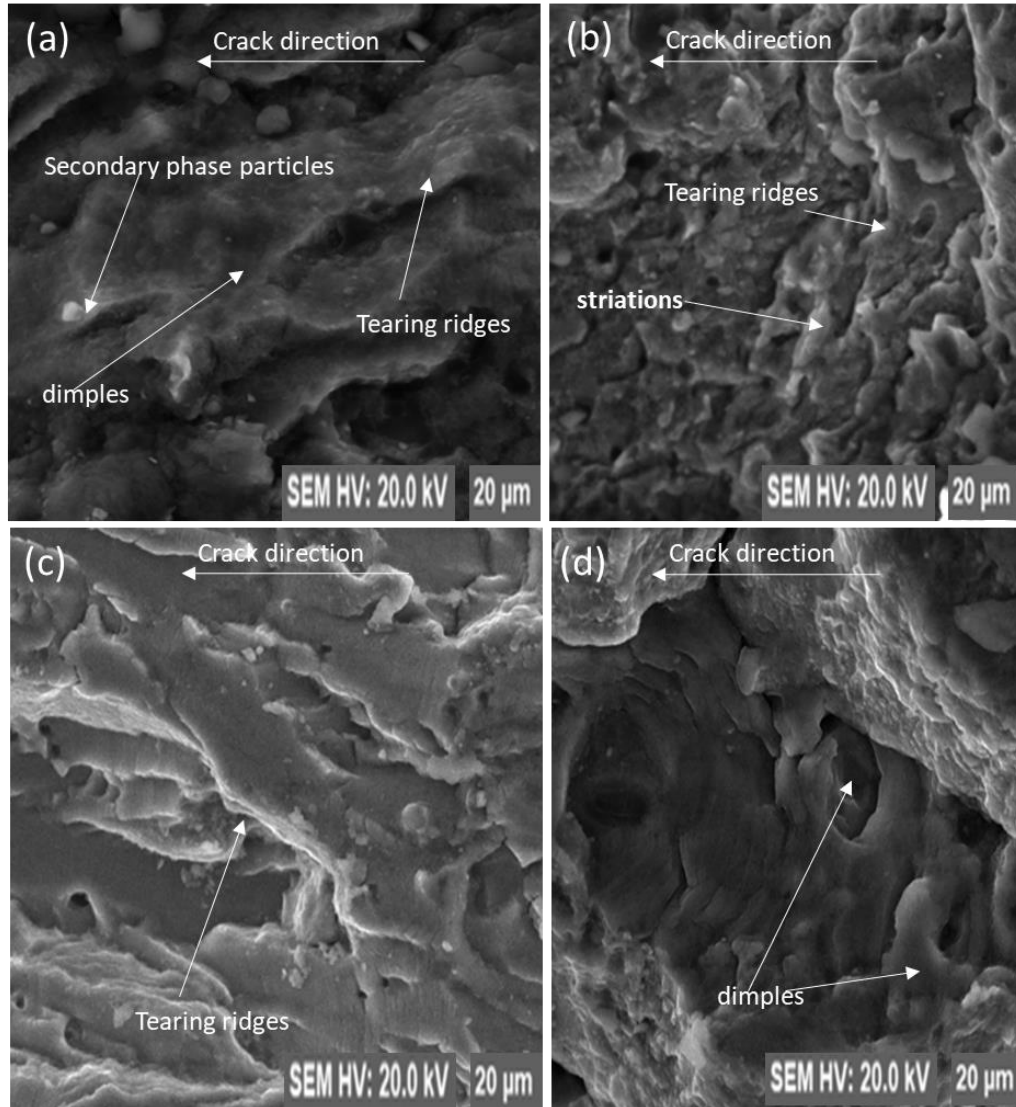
Fatigue crack propagation morphology of Al alloy 7075-T7, (a) CPS - countersunk rivet hole, (b) CPF - countersunk rivet hole, (c) CPS – perpendicular rivet hole, (d) CPF - perpendicular rivet hole.
